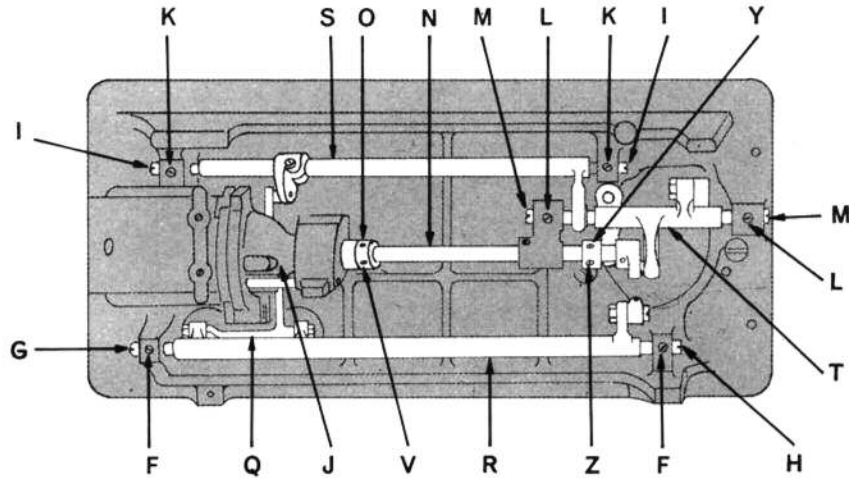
Setting Feed Dog Sidewise and Adjusting for End Play or Binding.
